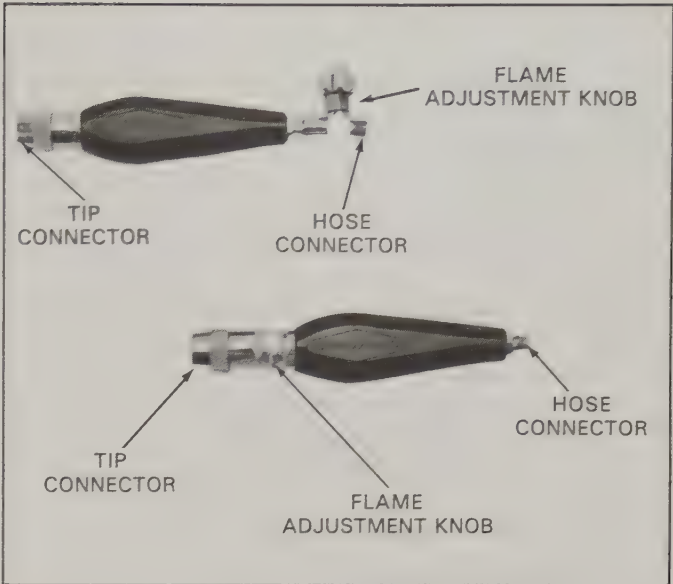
Air-acetylene torch handles include connections for the acetylene hose at one end and for the torch tip at the other. As shown in the two examples, a finger-operated knob for flame adjustment may be at the hose end of the handle, or at the tip end. (Uniweld)
